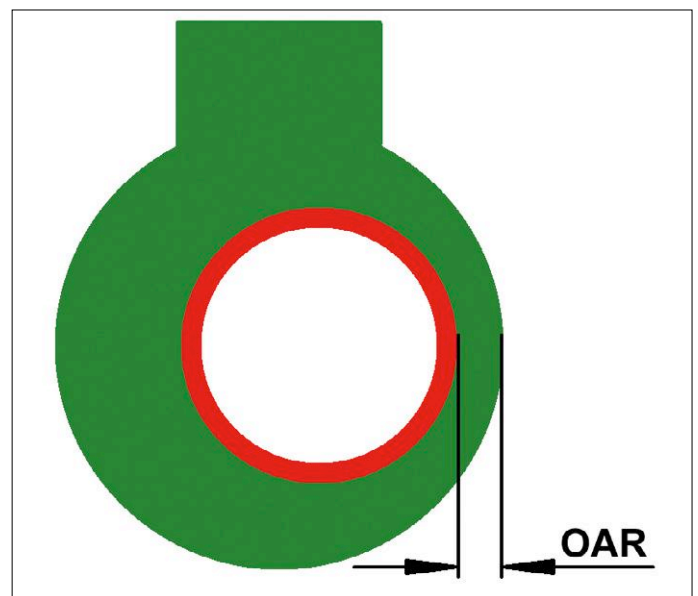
Due to manufacturing tolerances a hole may be drilled off-center. To allow for plating (the red ring) the hole must be drilled larger than specified. The finished hole (with plating) will have the diameter you specified. The ring that remains after drilling is the annular ring (AR). The minimum acceptable outer annular ring (OAR) shown here is specified by the design rules (DR).
